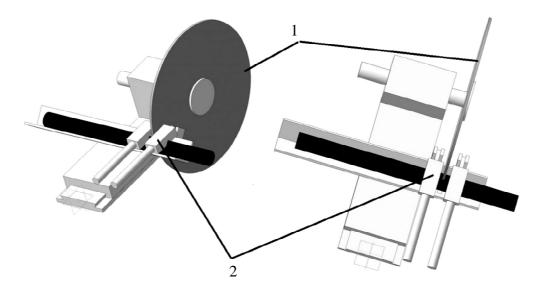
Scheme of HPH fixing (clamping) with regard to cutting disc: 1 - cutting disc; 2 - hose fixers
